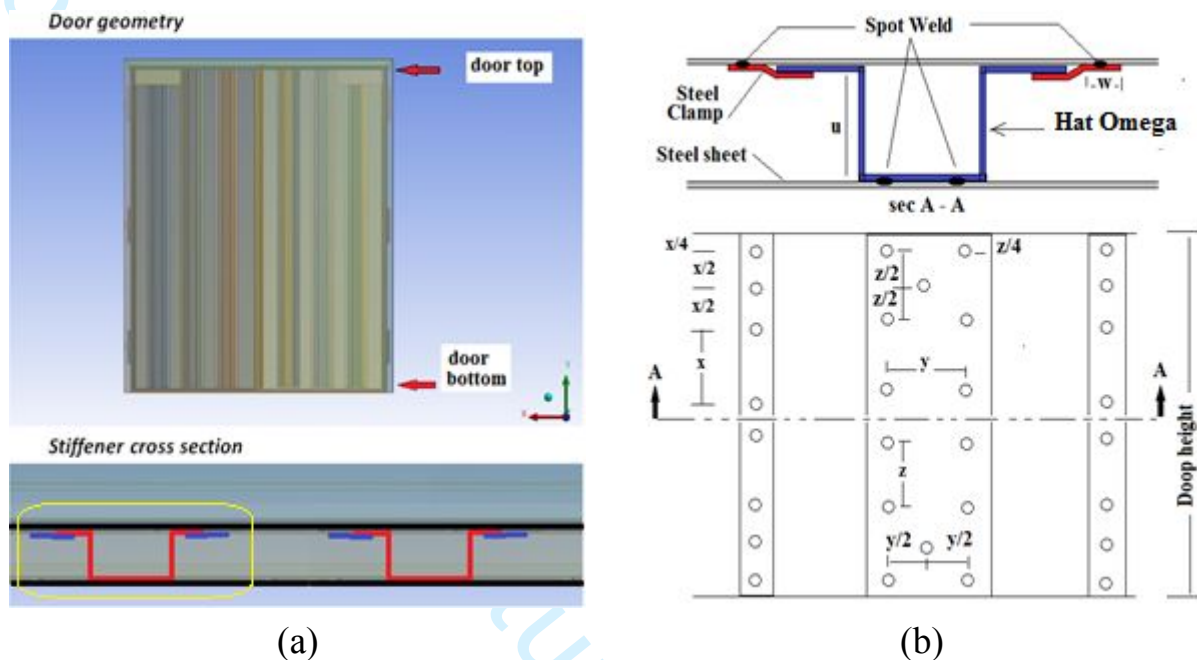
overview internal door structure (a) welding map for the hat omega cross section assembly with the door sheets (b)
